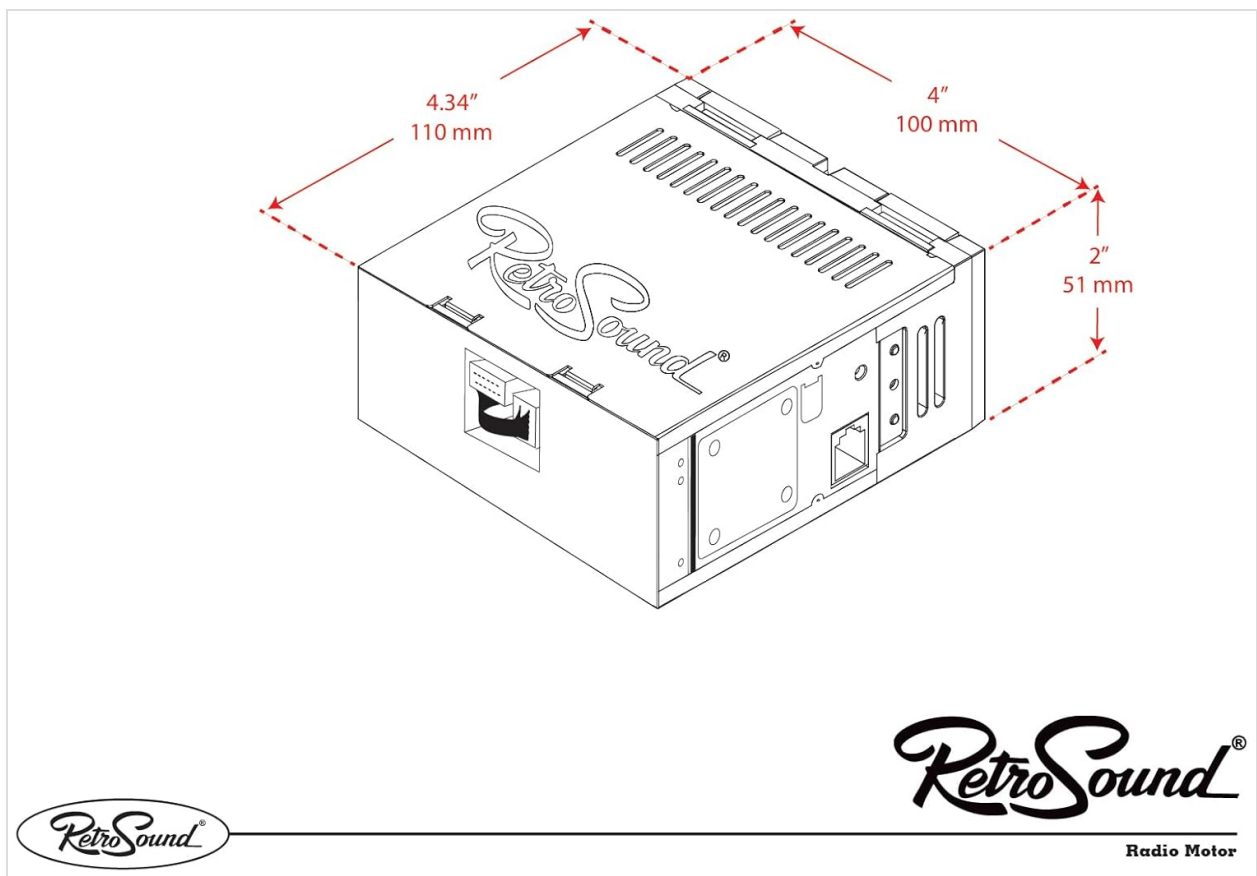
Dimensional drawing of the RetroSound Laguna radio unit, indicating measurements in both inches and millimeters for installation planning.
